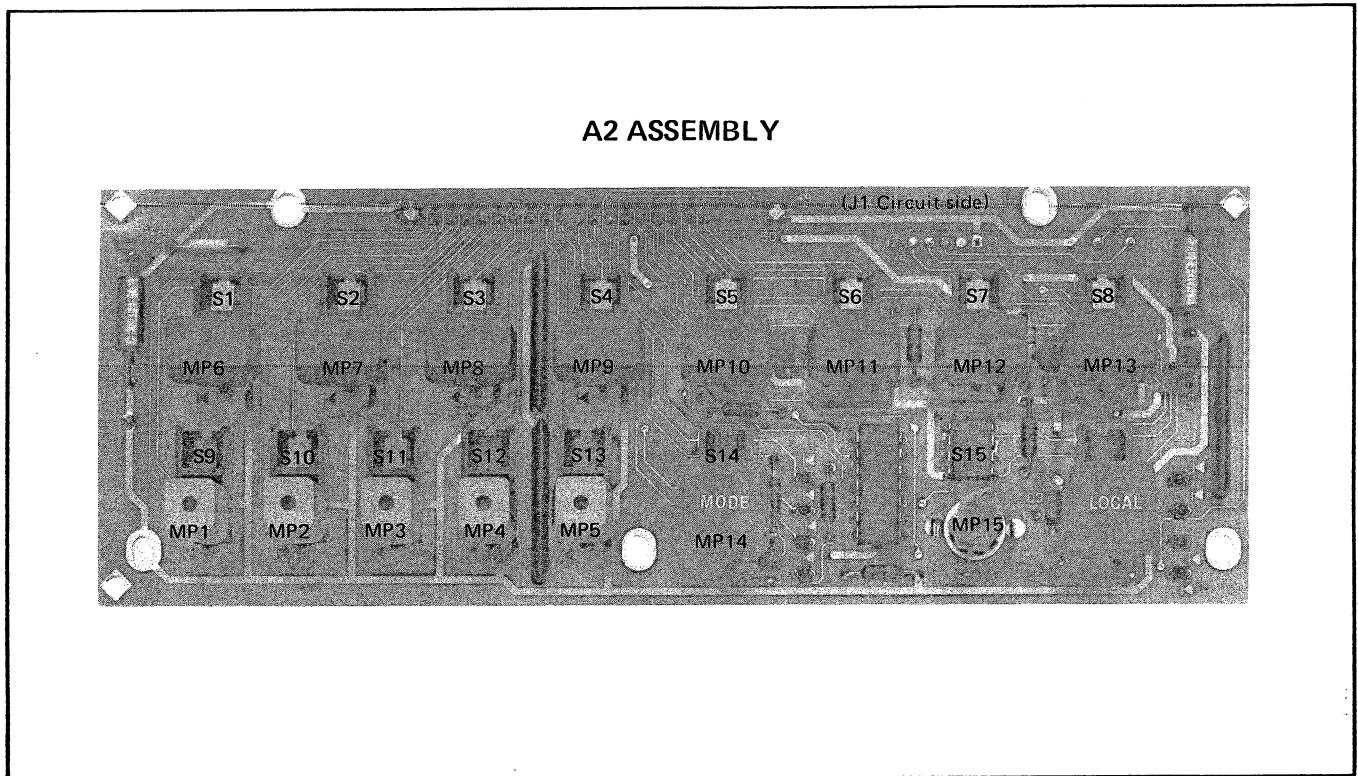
Front Panel Key and Display Board Assembly Component Locations
